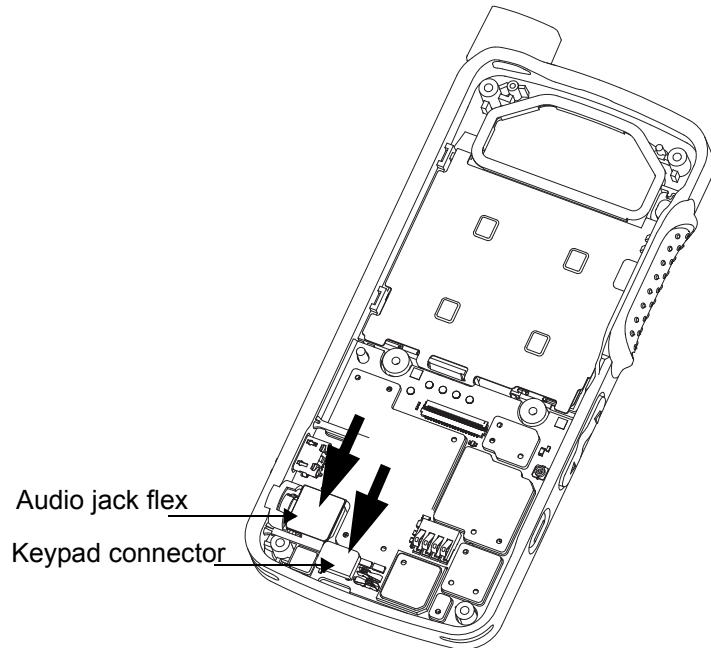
Audio jack flex connector and keypad connector reassembly
